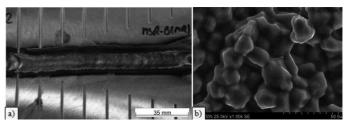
Houldcroft test results for the QE22 alloy: a) a remelted plate with a visible crack in the weld axis, b) crack area in the weld penetration, SEM
